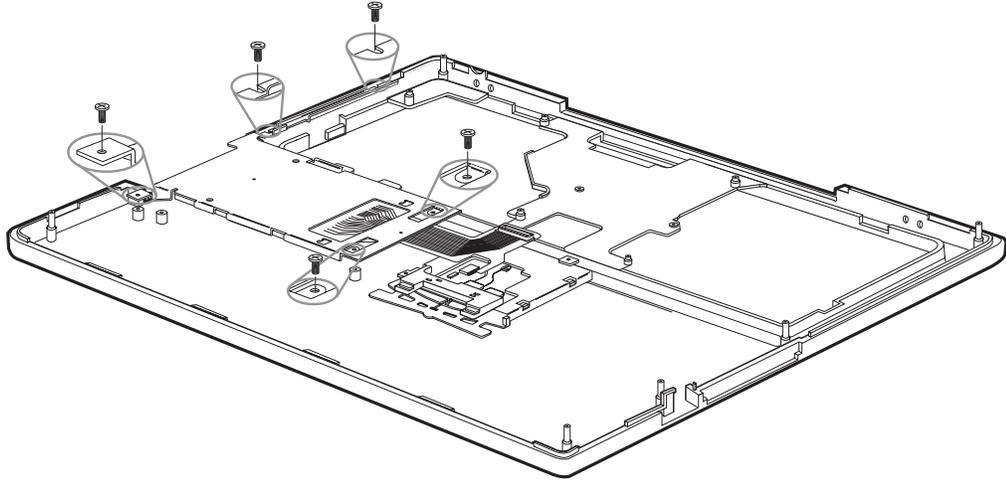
Removing the UMI Assembly (Underside of Keyboard Deck)
